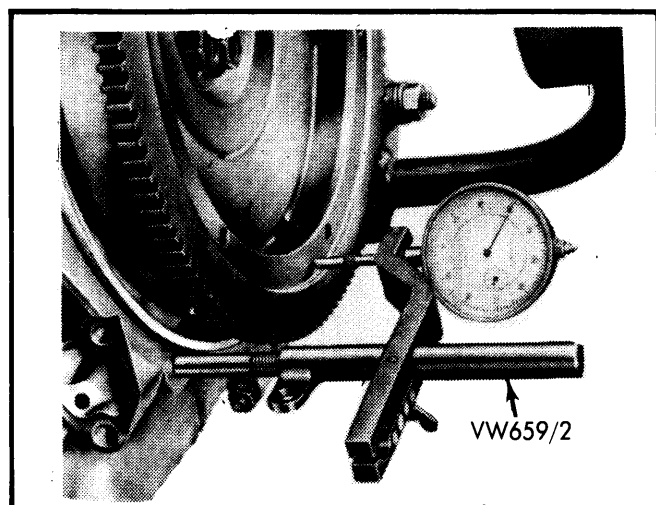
Using a Dial Indicator to Check Crankshaft End Play
